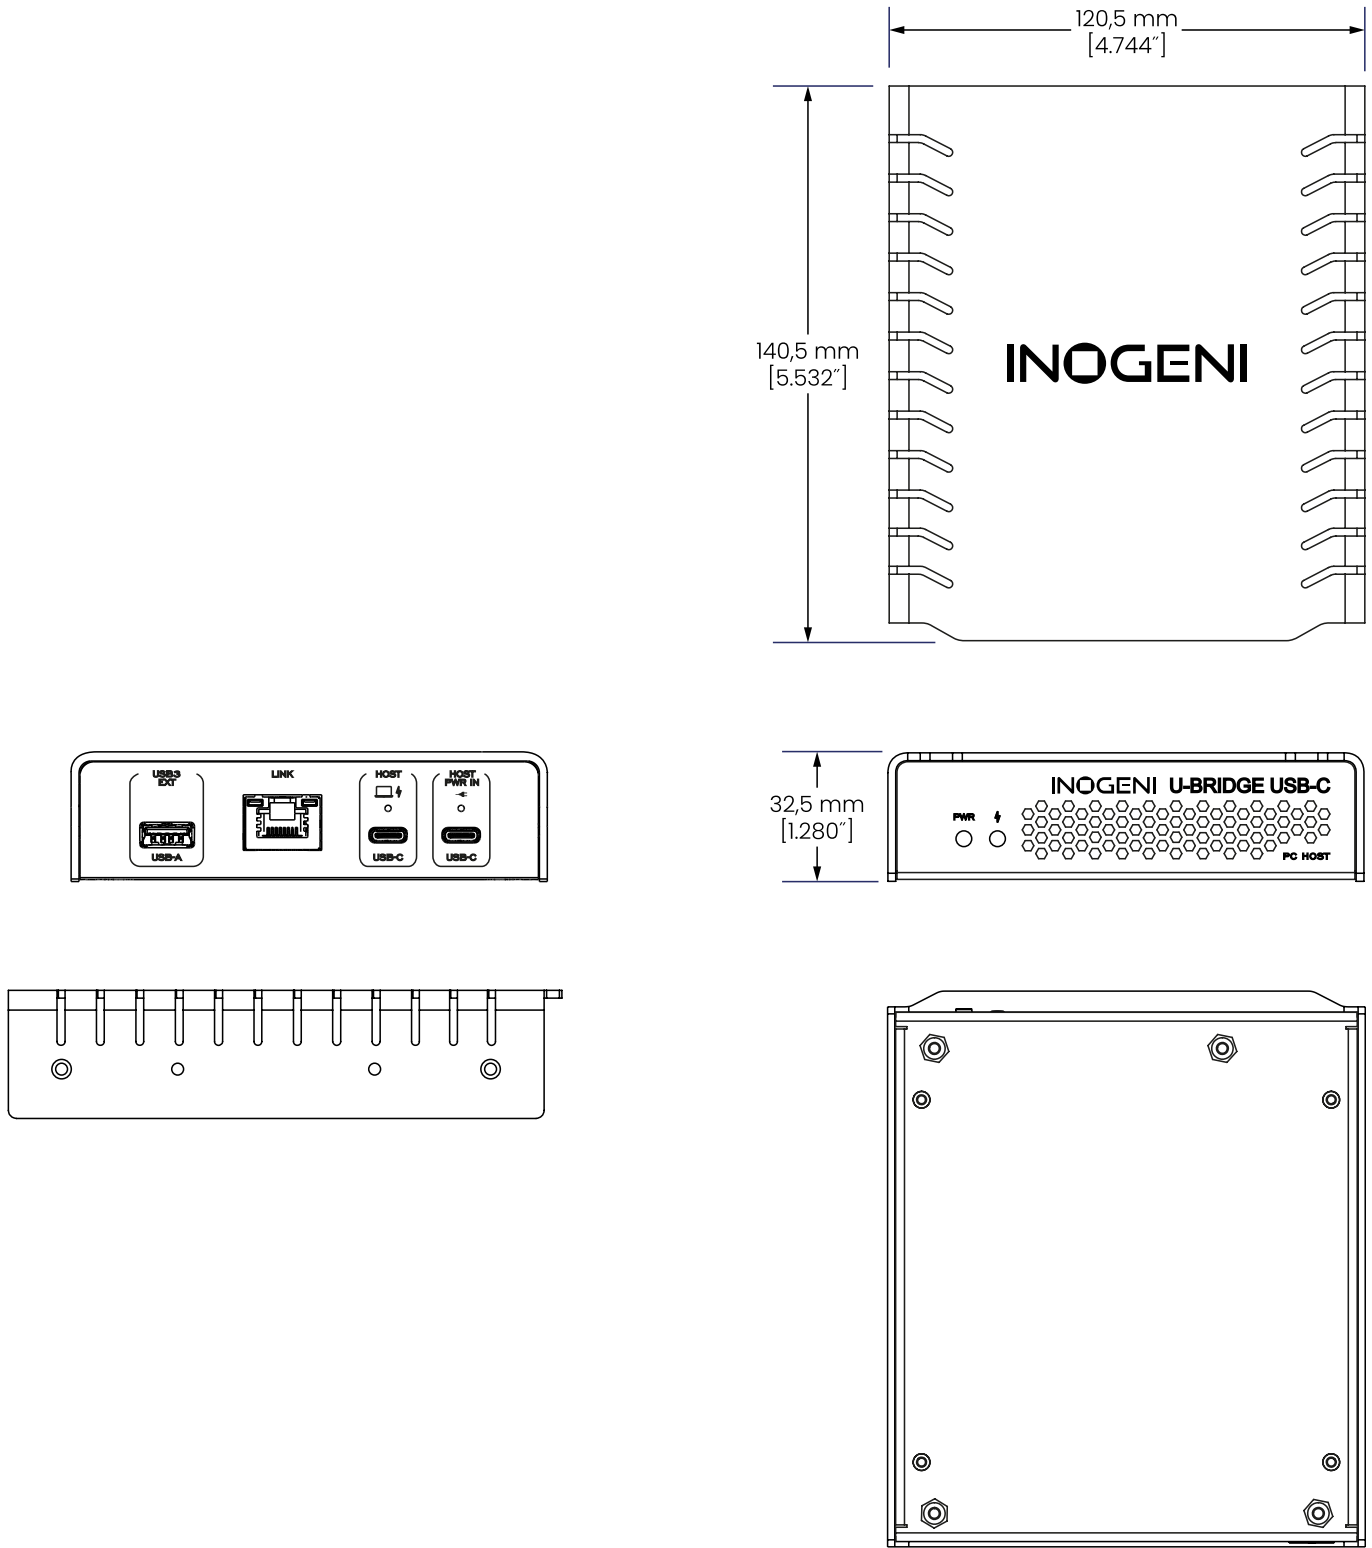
Bottom plate dimensions and holes positions of PC HOST hub – SINGLE variant
